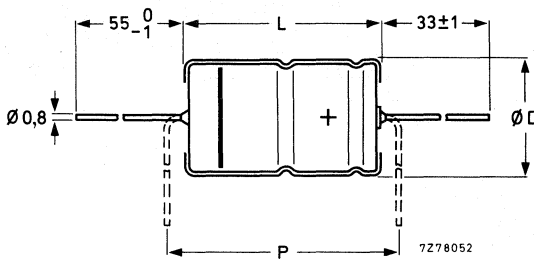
Case sizes 00, 01, 02 and 03. For dimensions D, L and P, see Table 1.
